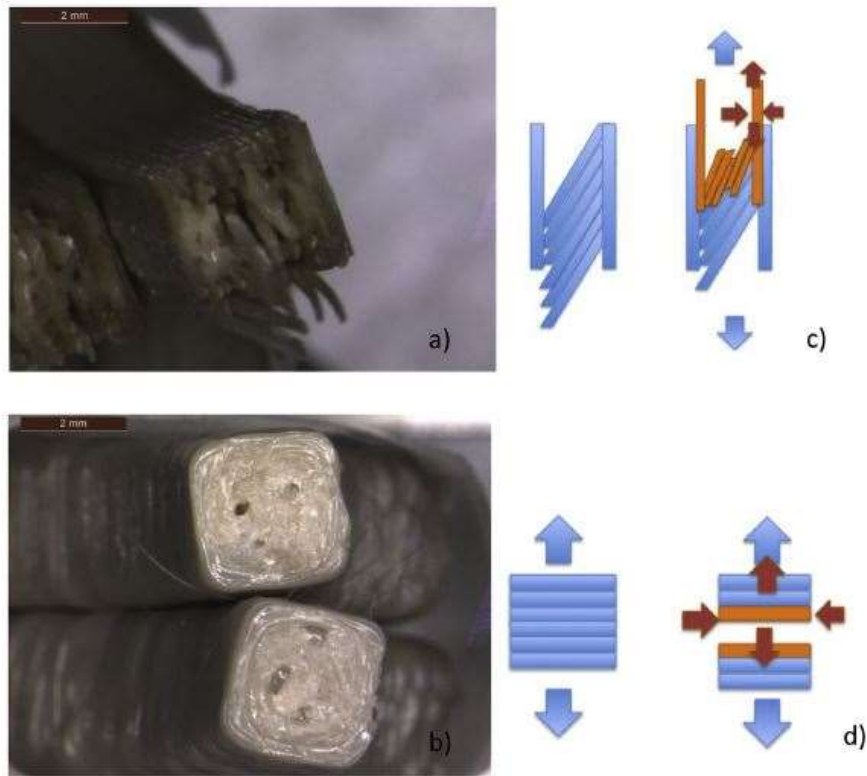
8 Fracture after tensile test a), b) XY direction printed samples
